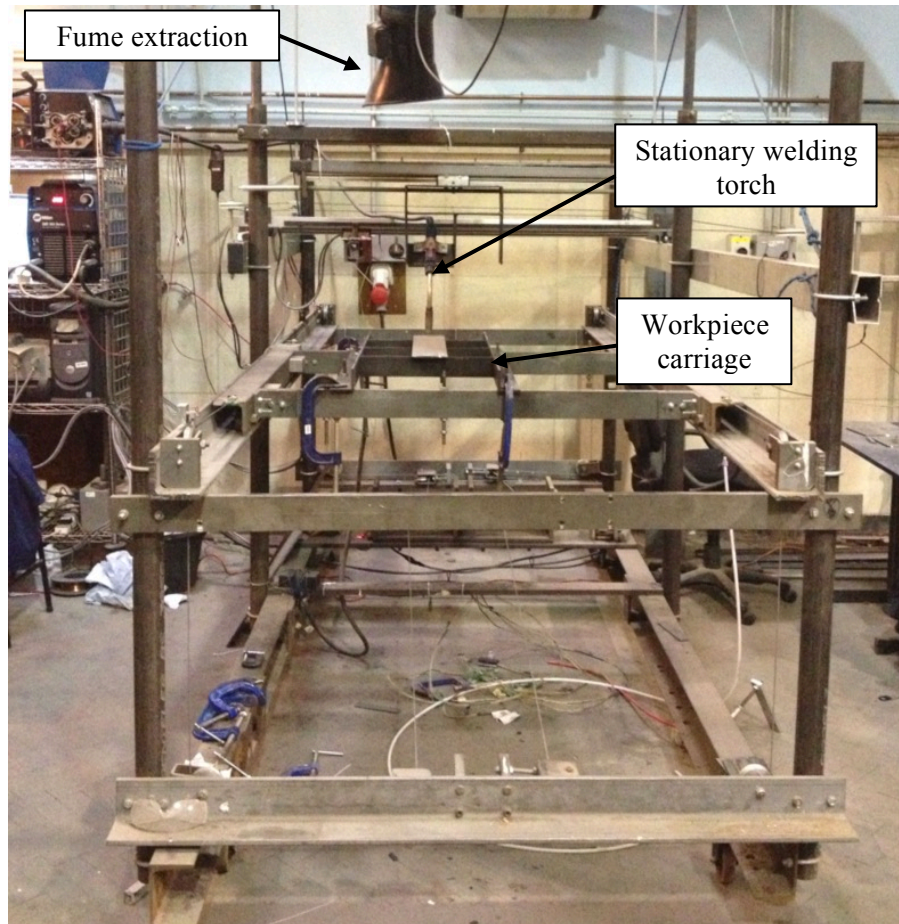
Automated welding rig with stationary welding torch
